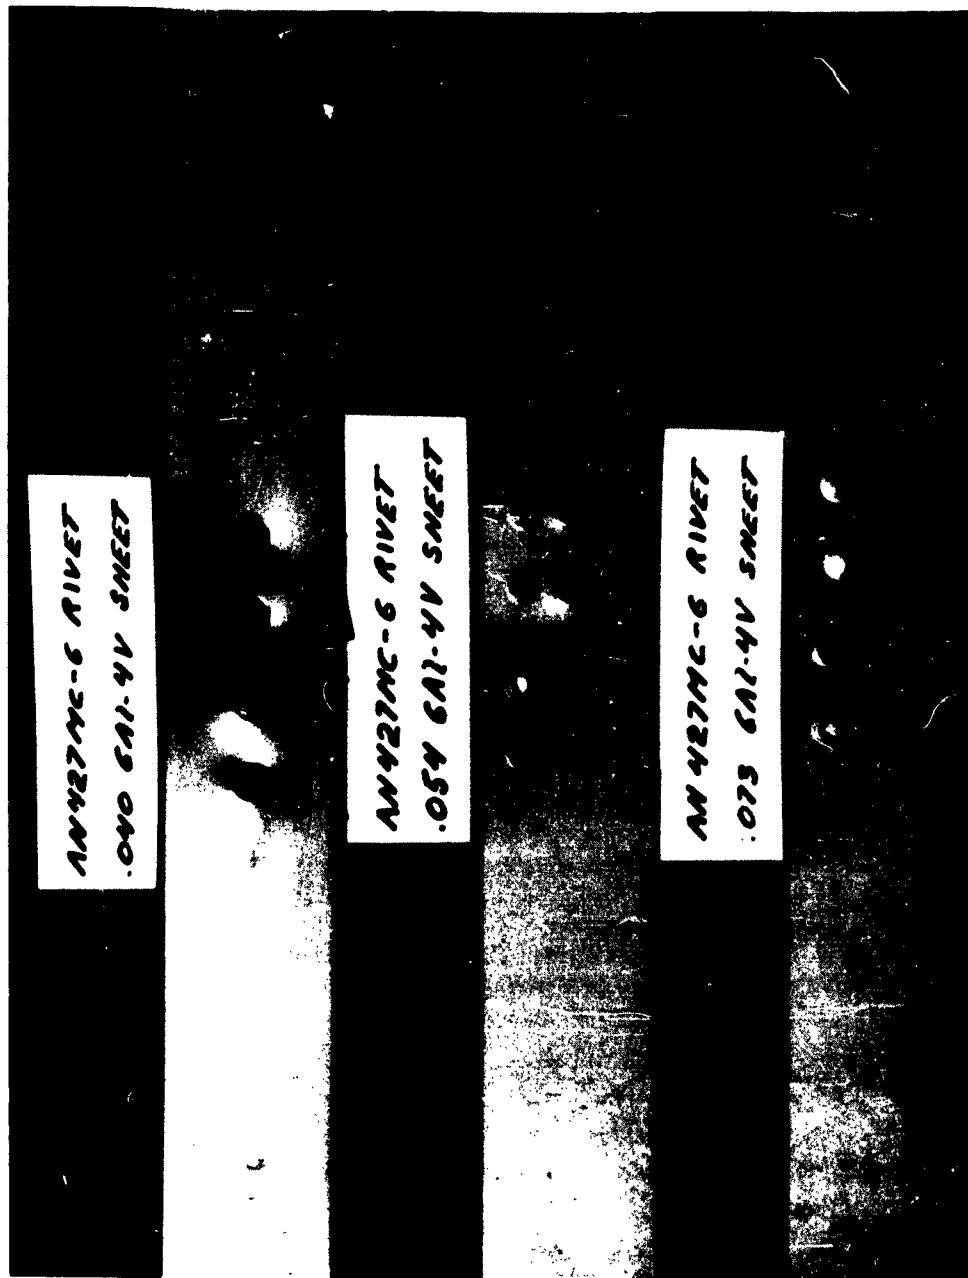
SPECIMEN FAILURE - 3/16 DIA. RIVET
